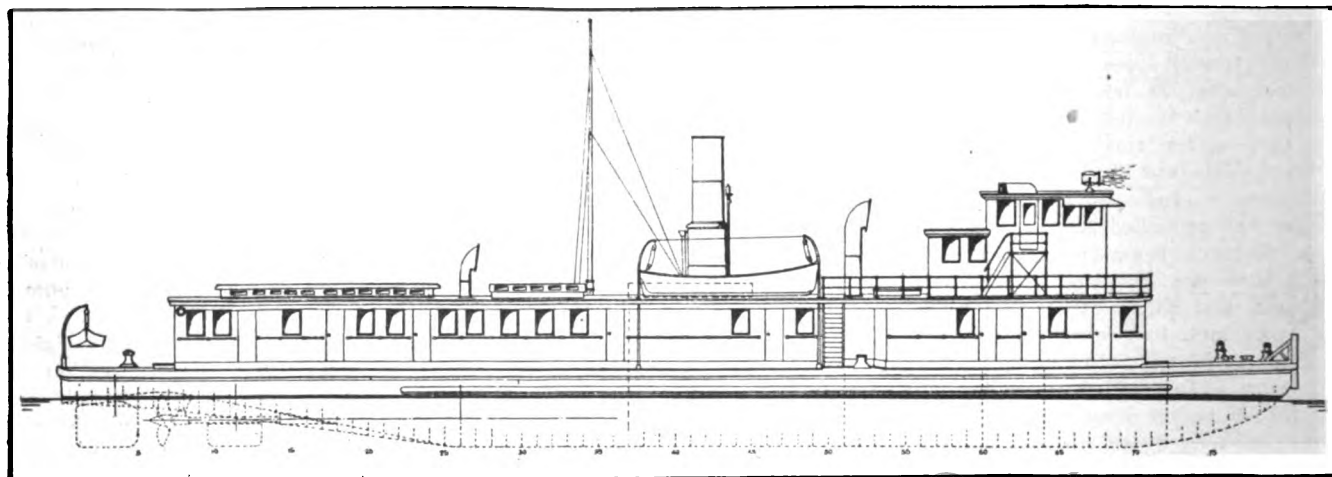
SIDE ELEVATION OF TUNNEL-STERN STEEL TOWBOAT FOR USE ON THE WARRIOR RIVER
